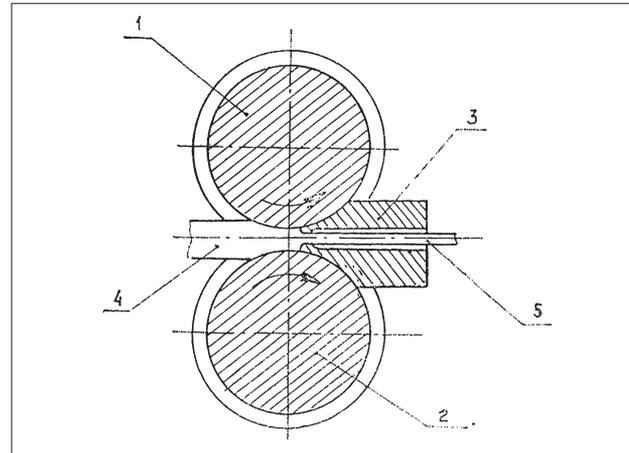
Setup for continuous pressing by the Extrolling process [17,18]: 1-upper roll with groove; 2-bottom roll with groove; 3- matrix; 4- semifinished product; 5- finished product
